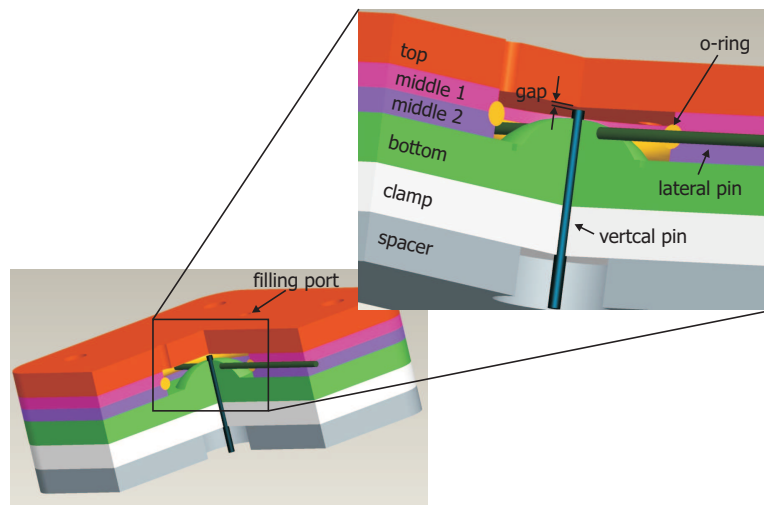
The negative mold for the valve body was achieved by mounting the bottom, middle and top layer on top of each other. Into a center hole of the bottom and clamp layer, a pin was inserted that defined the membrane thickness by its distance to the top layer (gap). To fix the pin in position, the hole in the clamp layer was smaller than the pin's diameter, which resulted in a tight fit. The spacer prevented movement of the pin during handling of the mold. The top layer contained two through-holes as filling port and vent.
